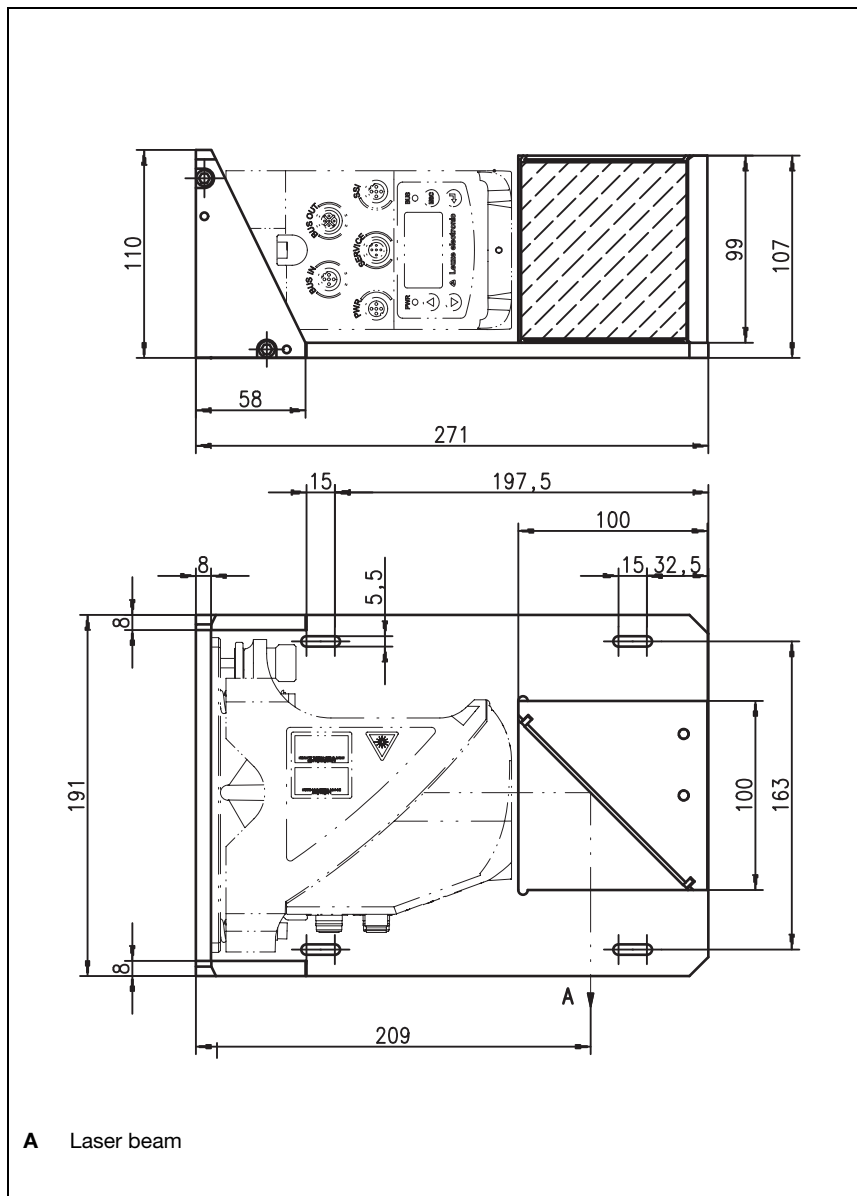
Dimensioned drawing of US AMS 01 deflector unit
